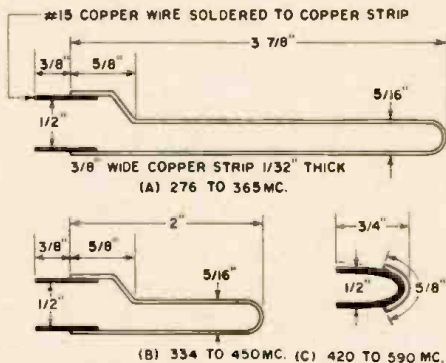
The shape and dimensions of coils used for frequency range of 276-590 mc.
